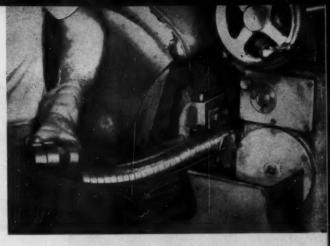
After punching, the exterior of the bearings is ground on this centerless grinder. Work travels between regulating and grinding wheels on carbide-faced blade.
